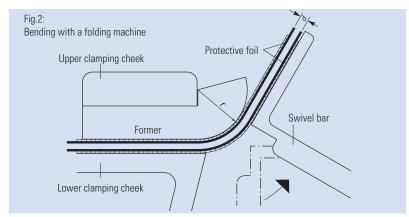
When working with folding machines, the panel to be bent is clamped between two cheeks. The projecting edge is bent around the upper clamping cheek and former using the movable swivel bar. The bending radius is determined by interchangeable formers attached to the upper clamping cheek.
